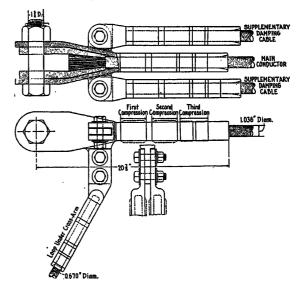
Detail of Conductor Cable Socket Clamp for Anchor Towers
